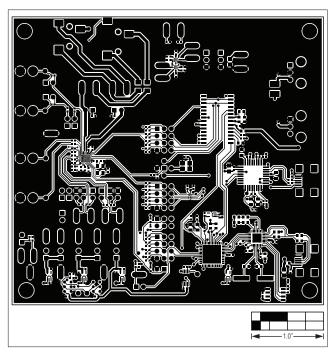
MAX9880A EV Kit PCB Layout—Component Side
